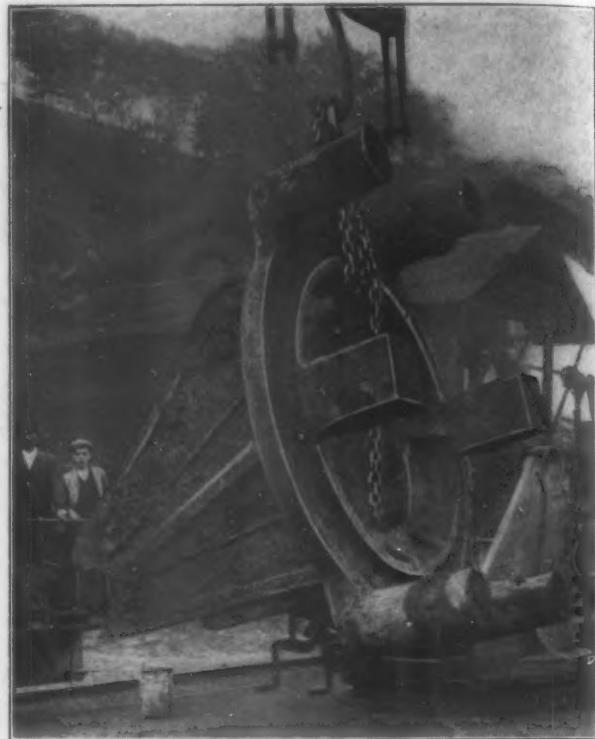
A Typical Casting Ready to Be Cut by the Machine
